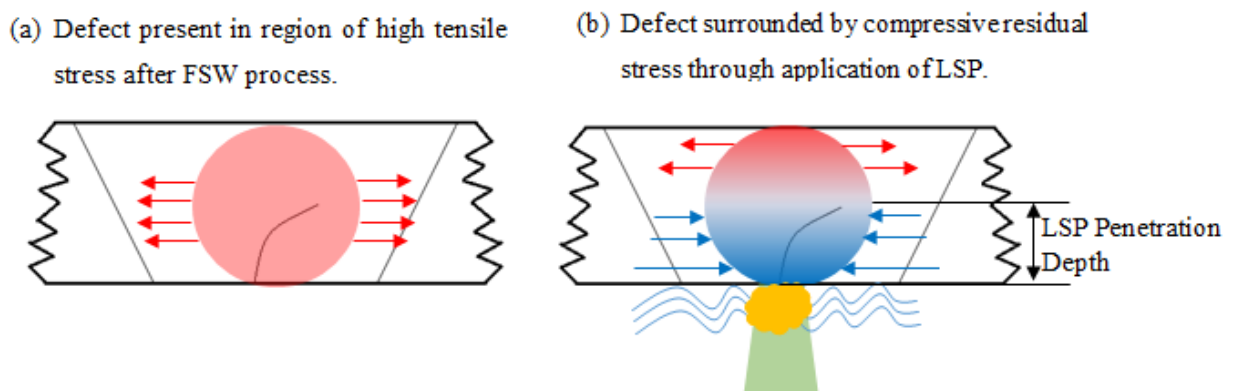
Schematic of Laser Shock Peening surrounding the Welding Defect
